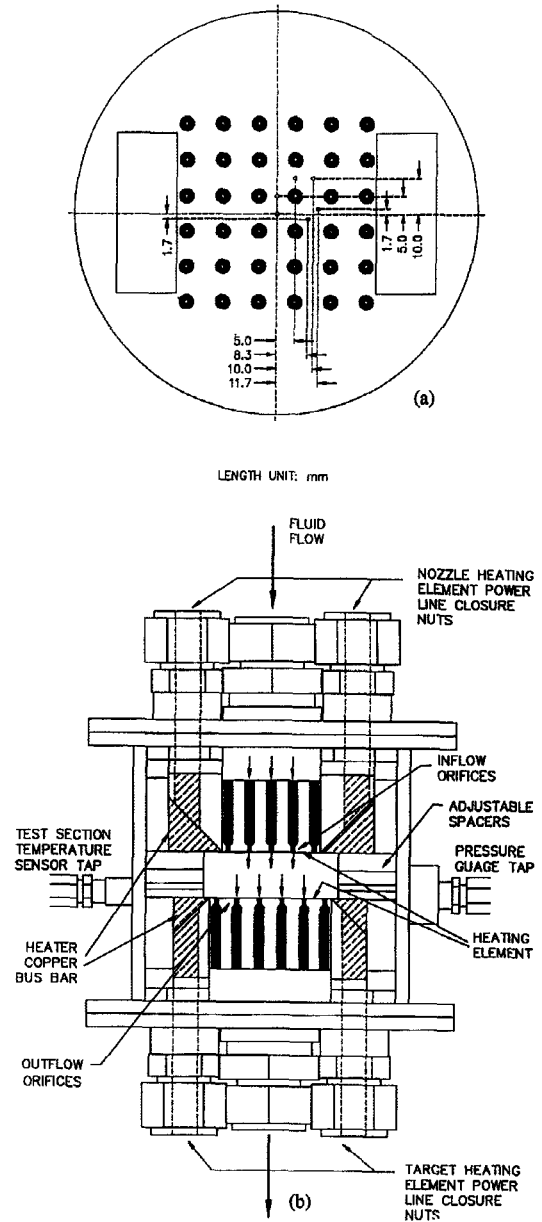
Multi-jet assembly: (a) target plate hole and thermocouple layout; (b) assembly cross-section.
